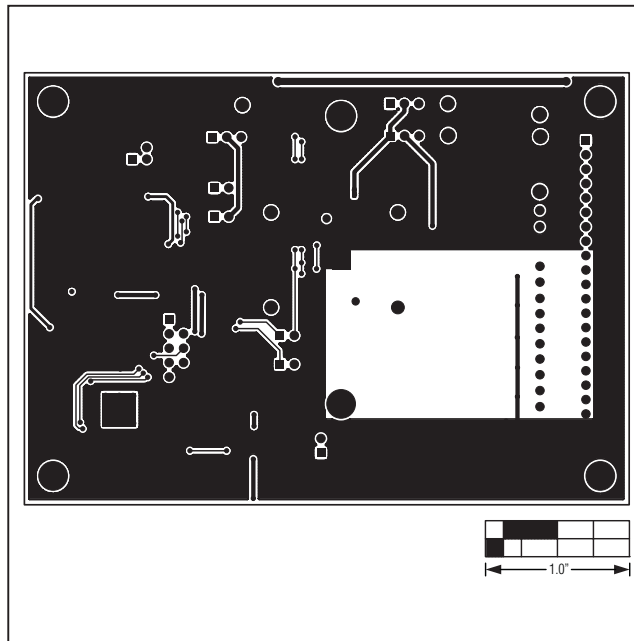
MAX9667 EV Kit PCB Layout—Solder Side
